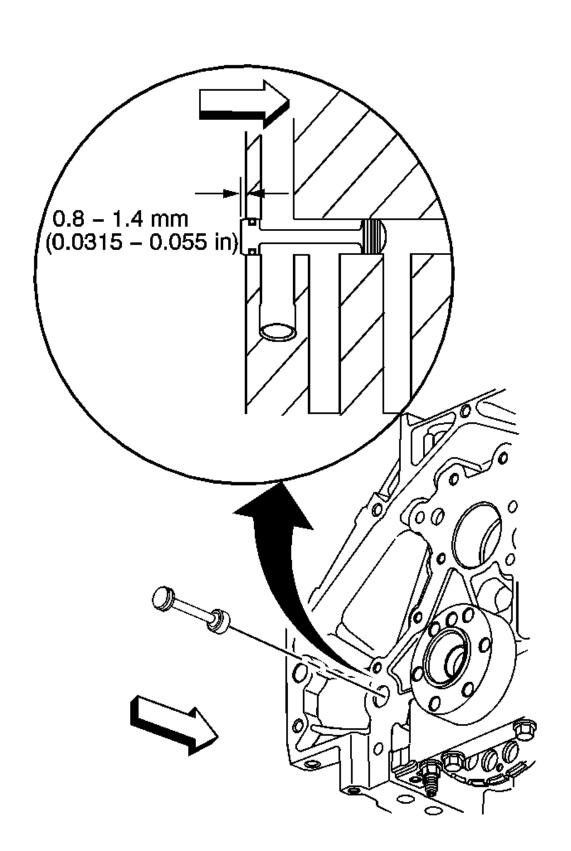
Locating Engine Block Left Rear Oil Gallery Plug & Seal Courtesy of GENERAL MOTORS CORP.
